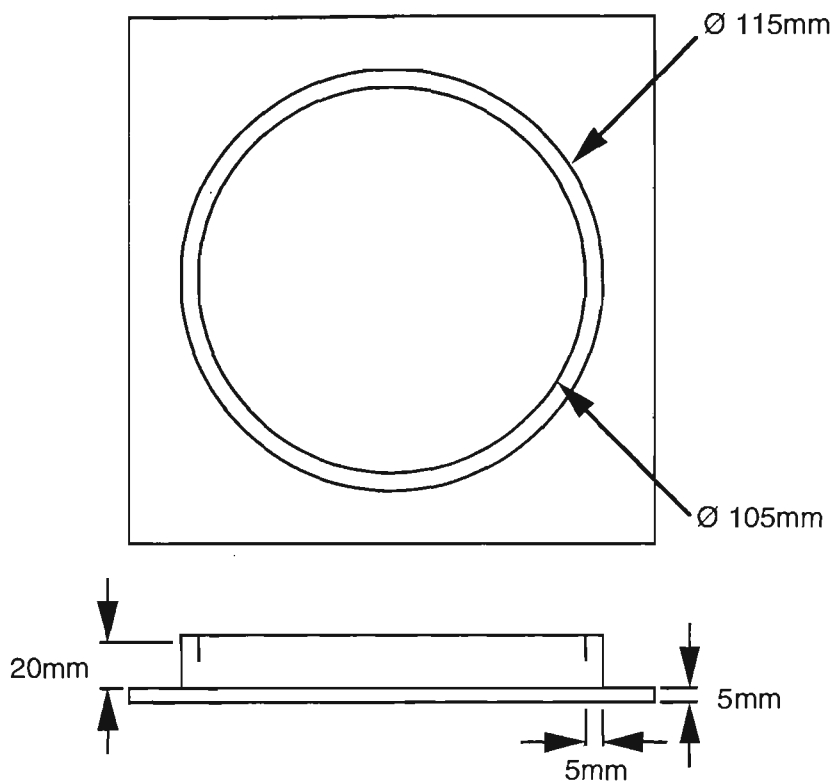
Mild steel mould used to cast molten metal for subsequent machining to monolithic targets. The ring and base-plate were joined by a TIG weld.
